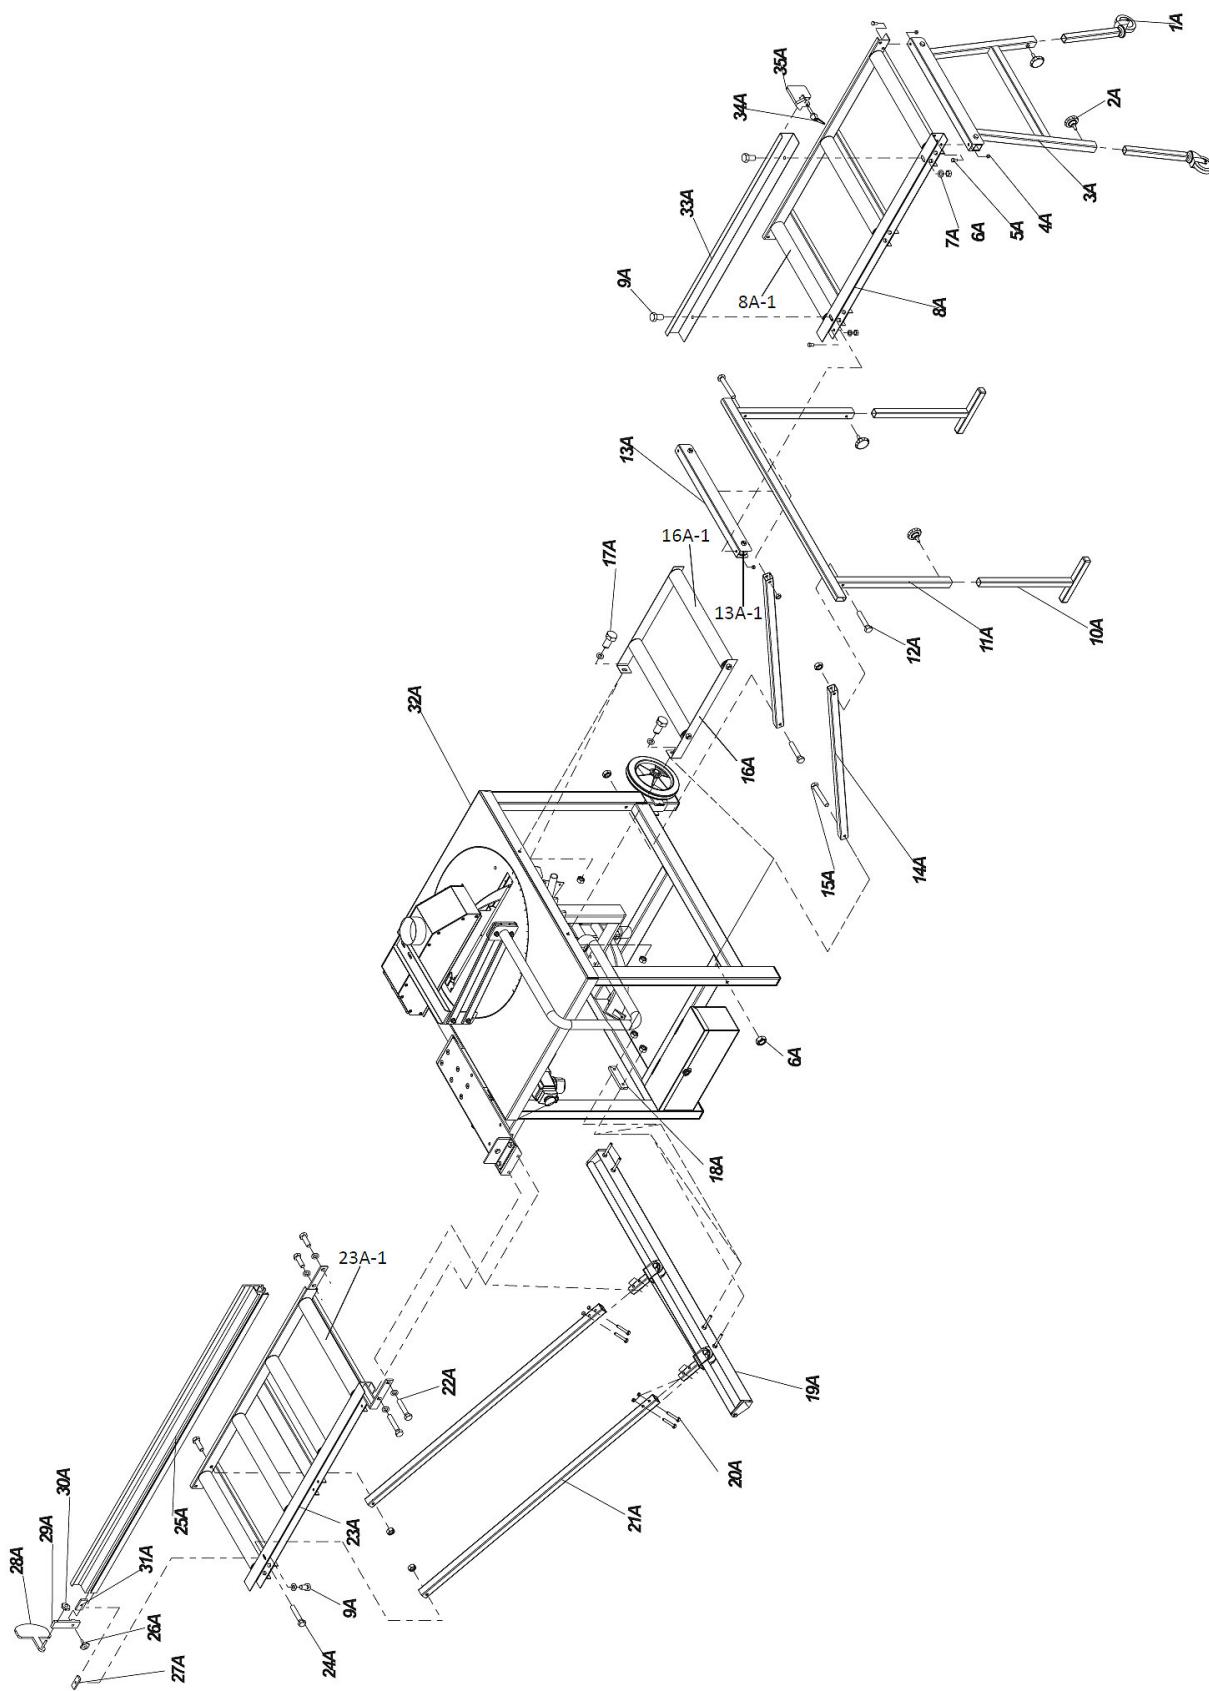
Spare parts drawing 2 - Circular saw TKS-Z 400
